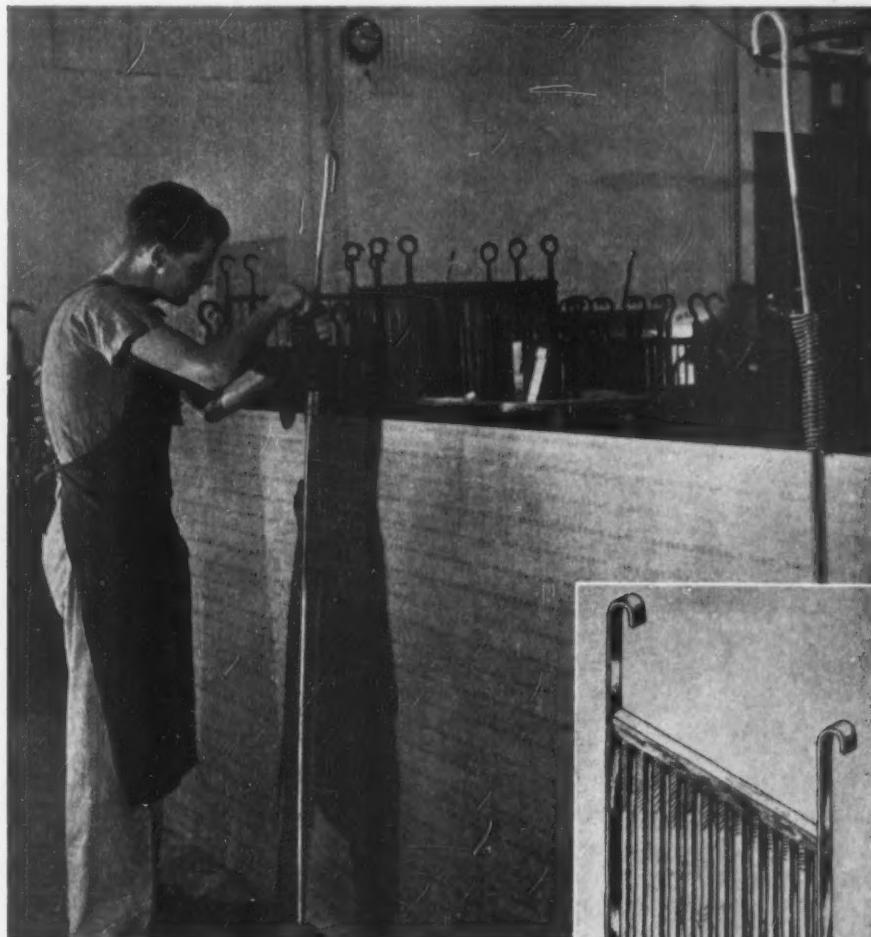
Above is illustrated the hinged-rod type of hanger for anodizing sheet stock. It is riveted loosely with one large rivet at the bottom.
